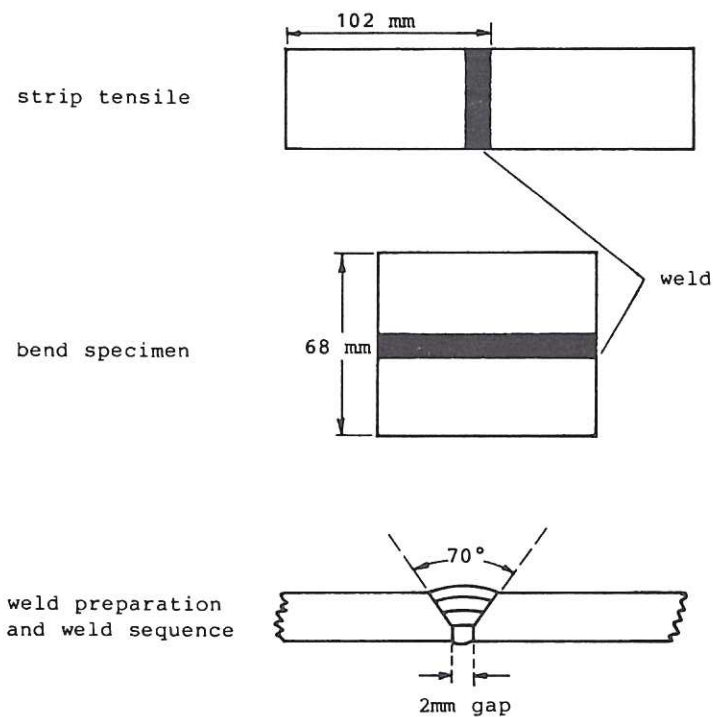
Configurations of the weld trials on 2 mm and 5 mm strip
